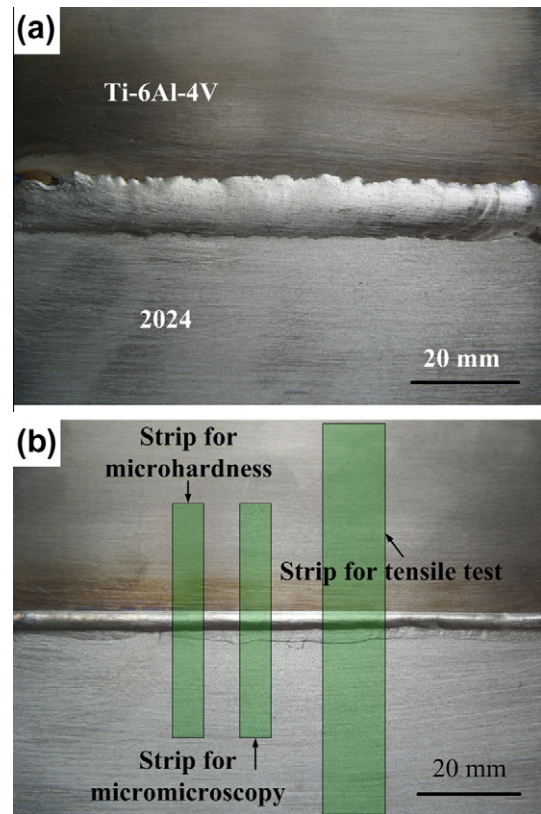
Typical weld appearances of the Ti/Al GTA welding–brazing joint: (a) top and (b) underside.
